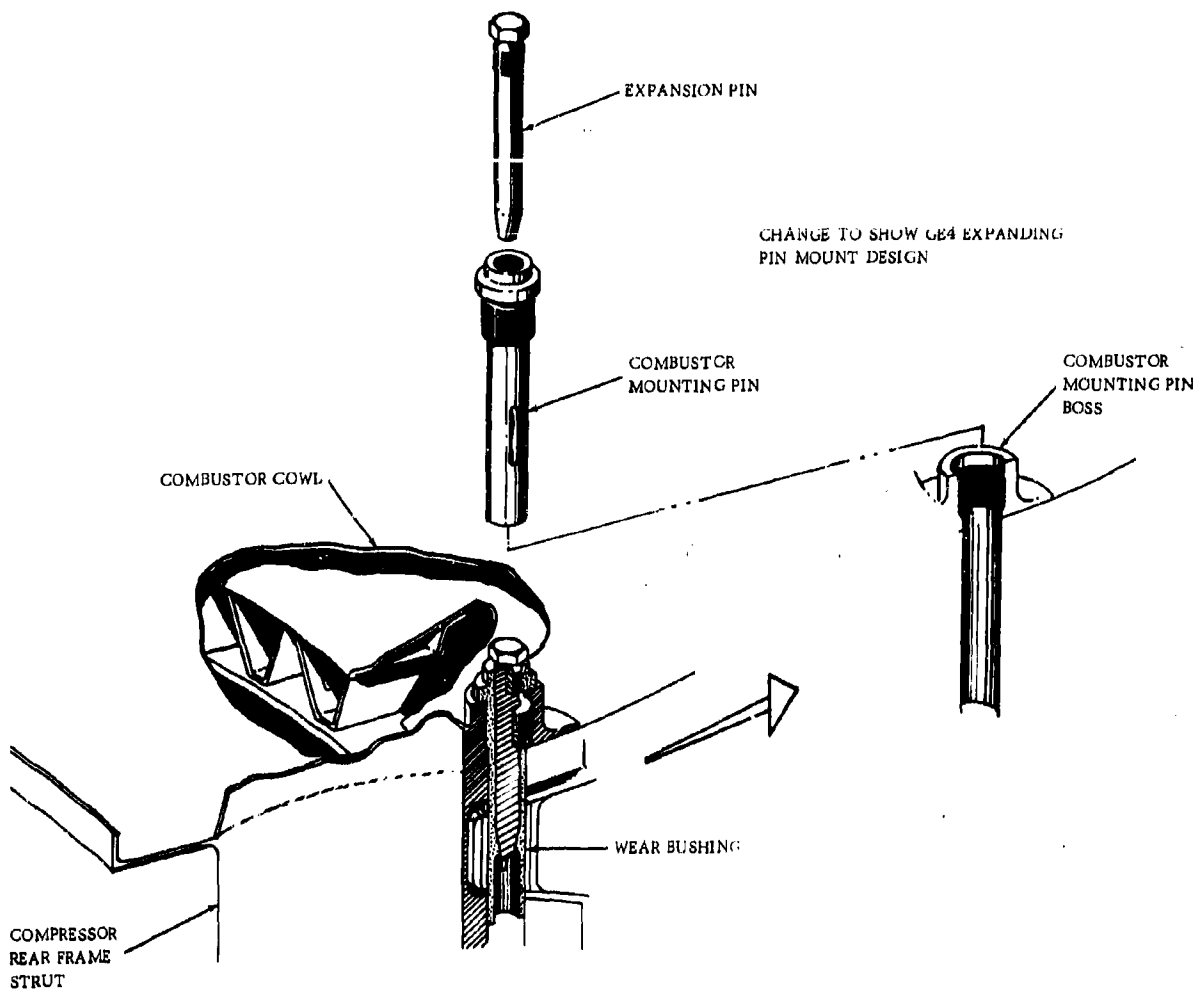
GE4 PHASE III COMBUSTOR MOUNTING SYSTEM
